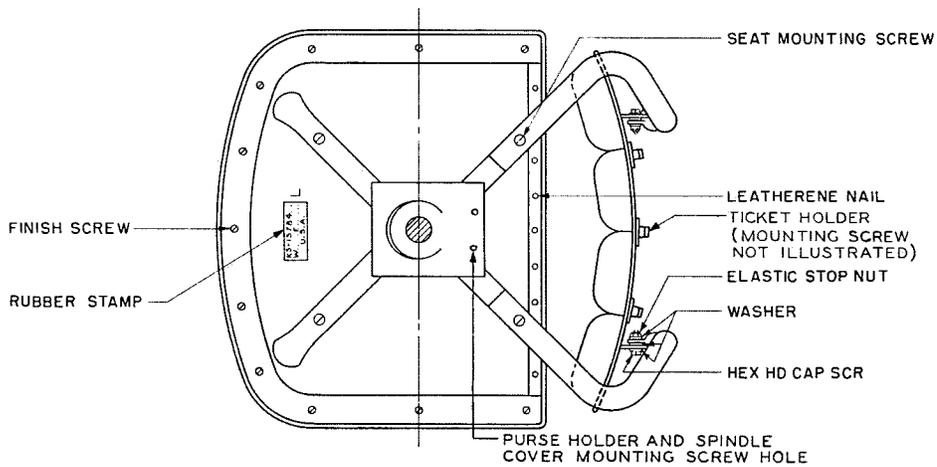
Bottom View of Upper Unit — KS-15784-type Operator Chairs
